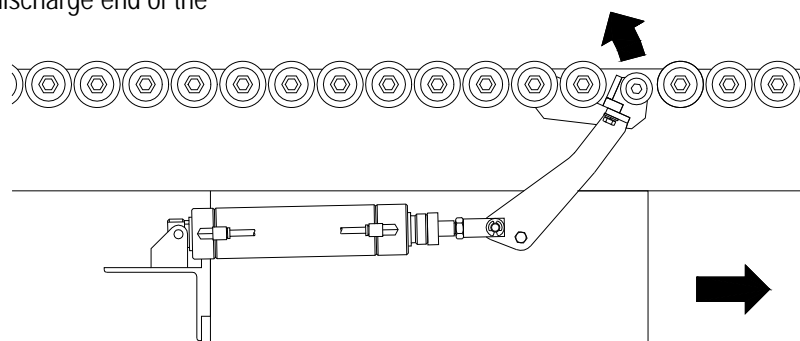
Adjusting The Disengaged Pivot-Assembly Position – Air-Actuated Case Stops
